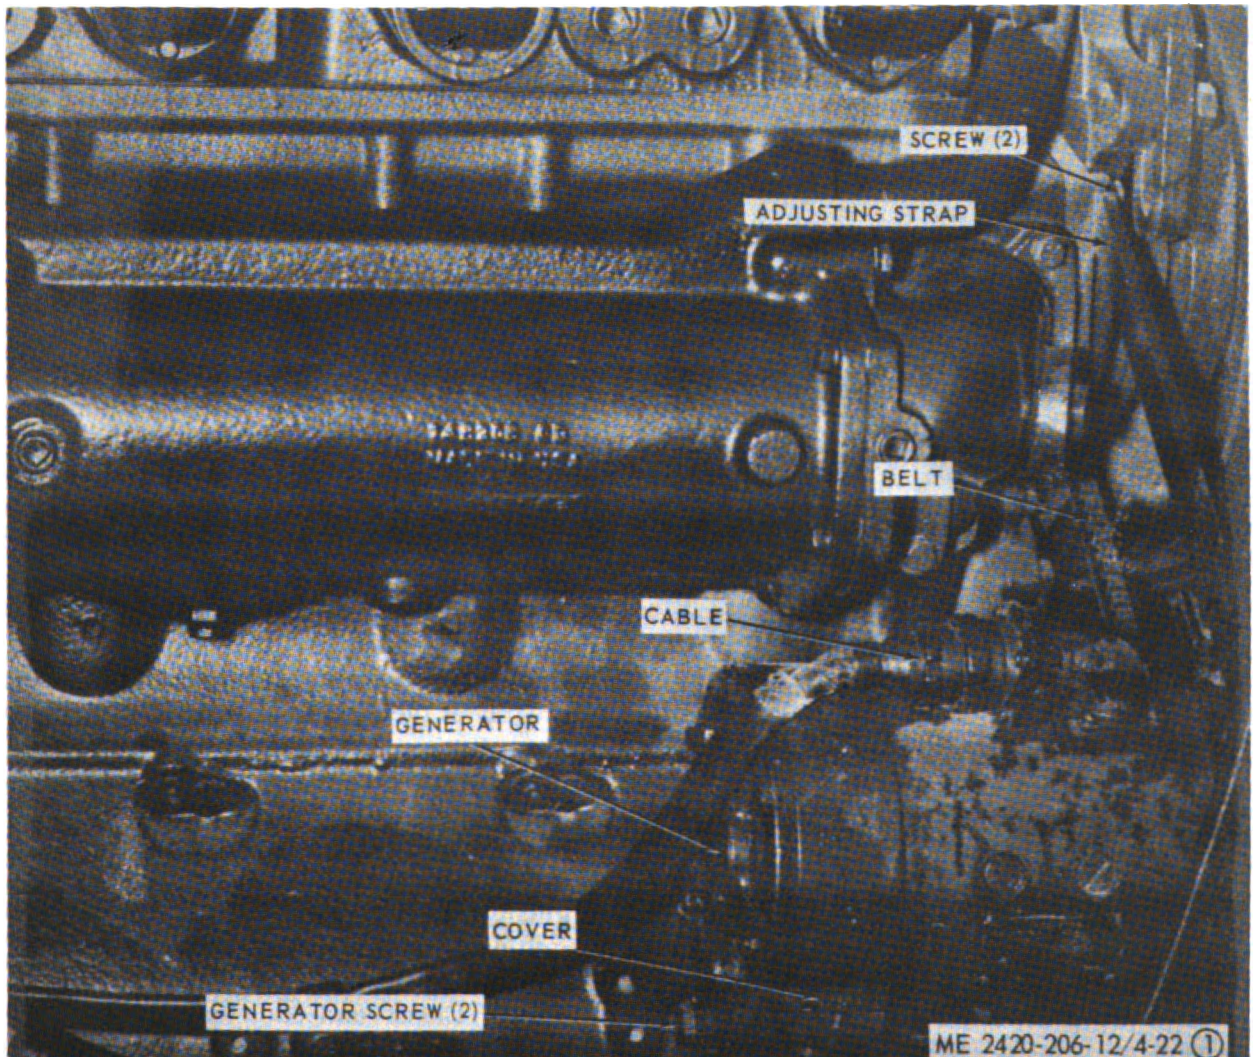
Generator repair, removal and installation (sheet 1 of 2).
